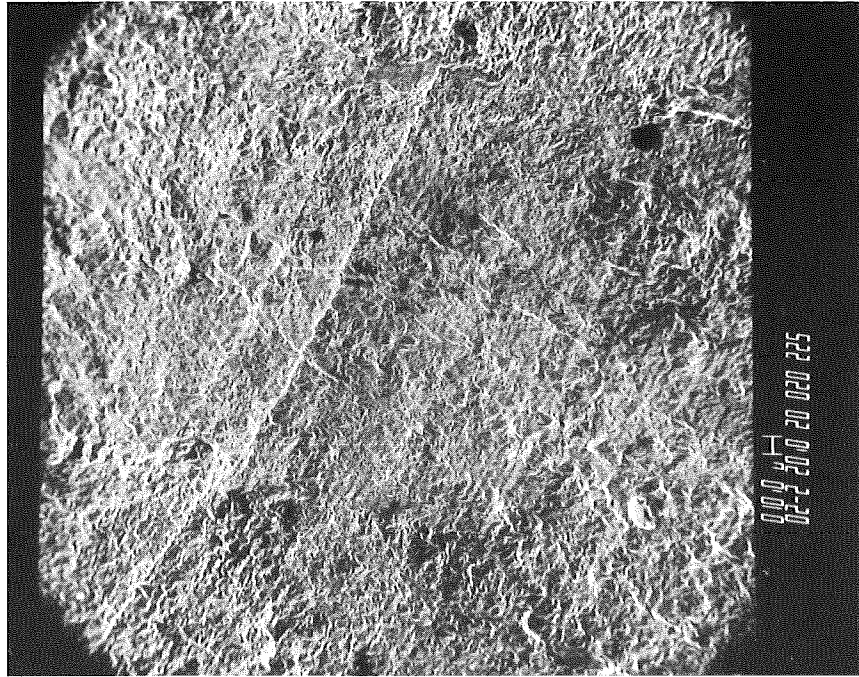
SEM Fractograph of Fatigue Crack Surface Shown in Fig. 40 @ 20X Showing Beachmarks on T2A-NB Top
